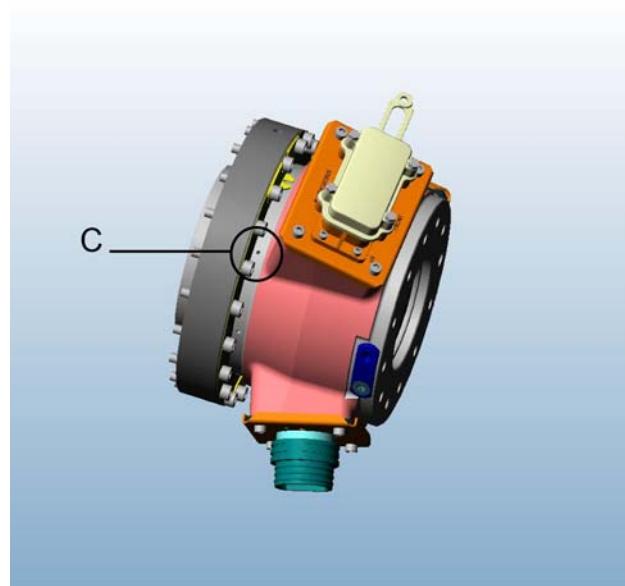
Seven holes C, on a radius of x mm from axis 6 center on the flange for IRB 6640ID.
